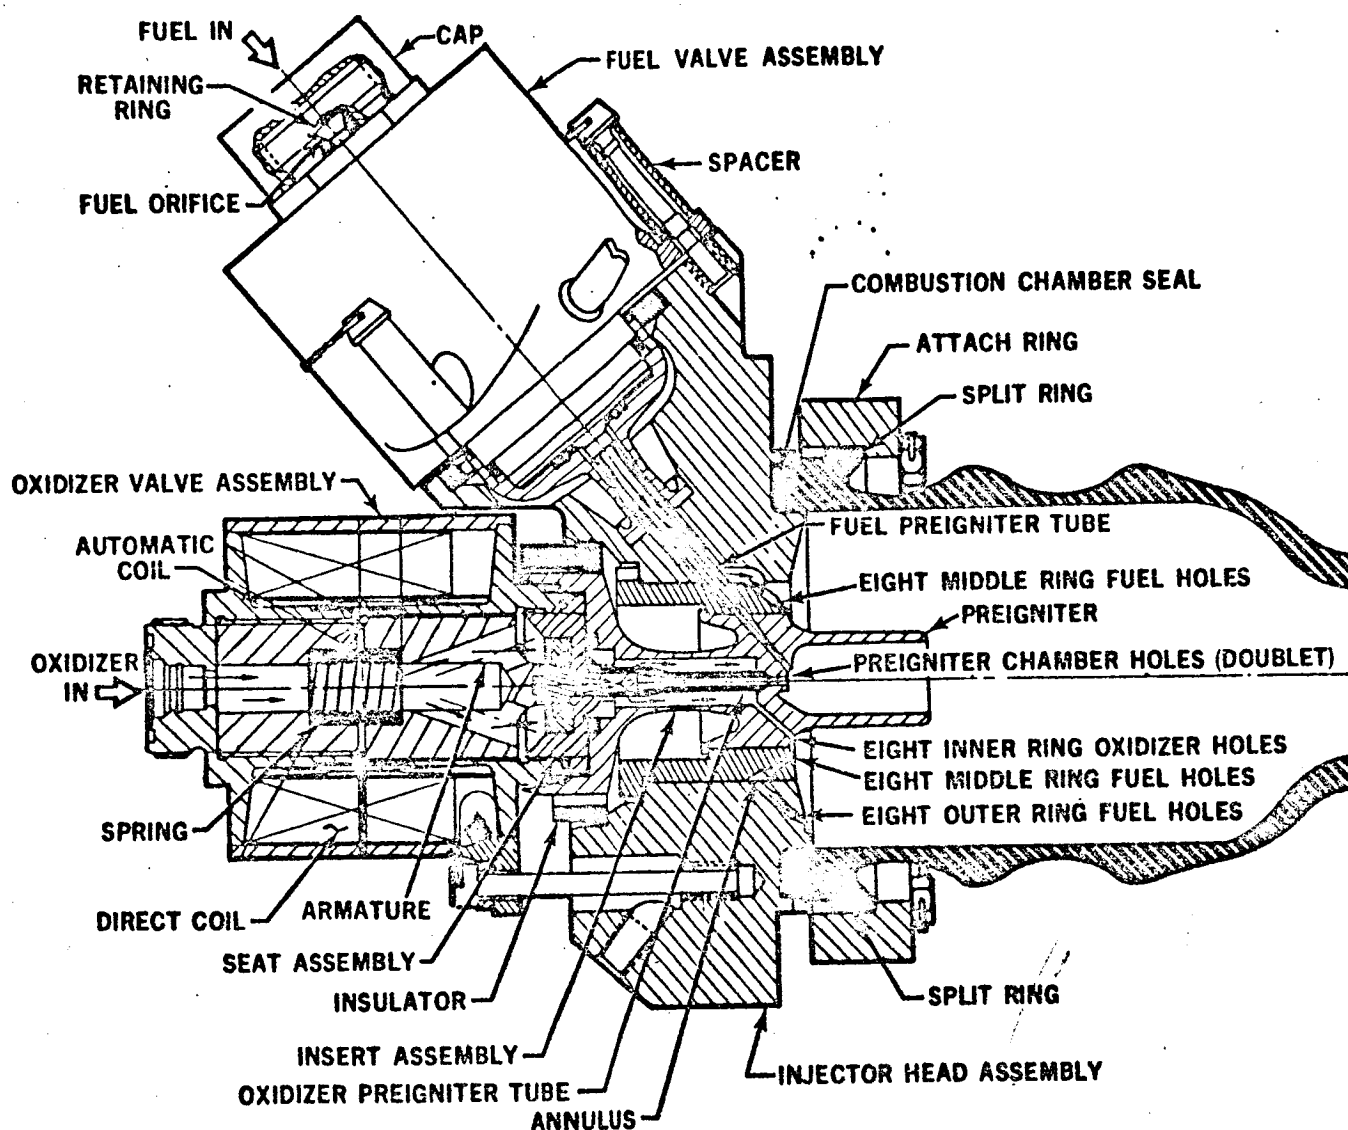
HEAD AND VALVE ASSEMBLY - MODEL R-4D ROCKET ENGINE
